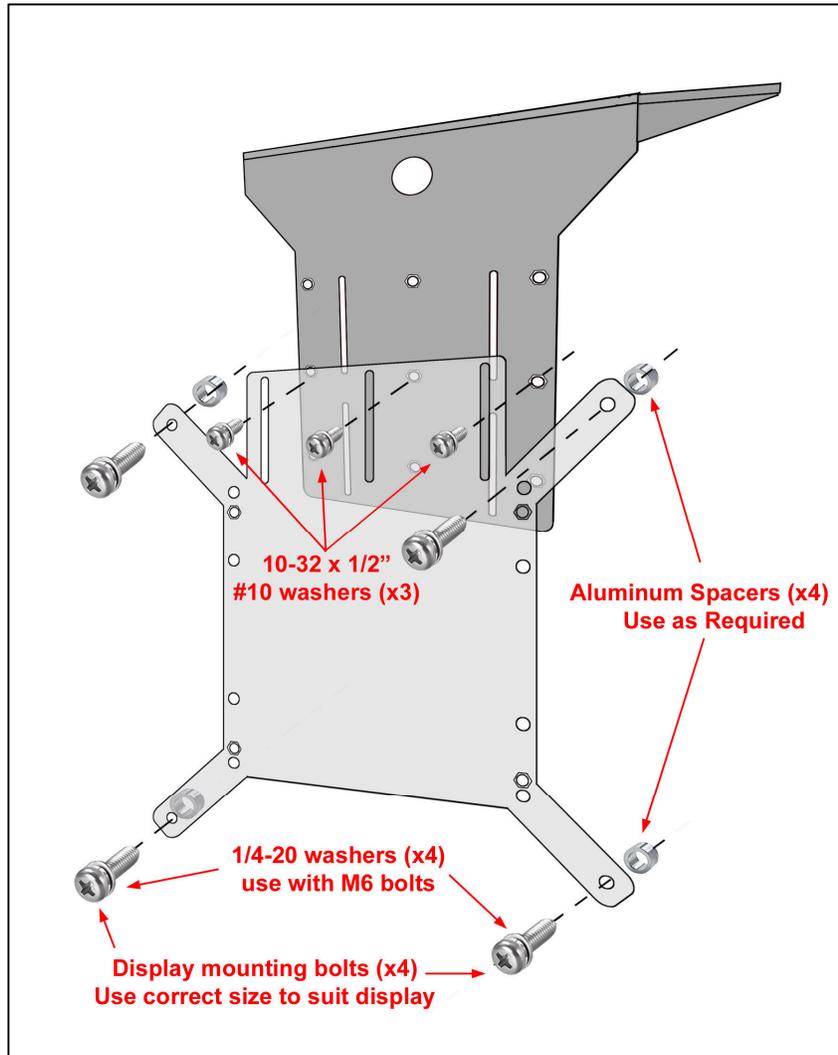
Attaching MedView Adaptor Plate to Mounting Bracket
